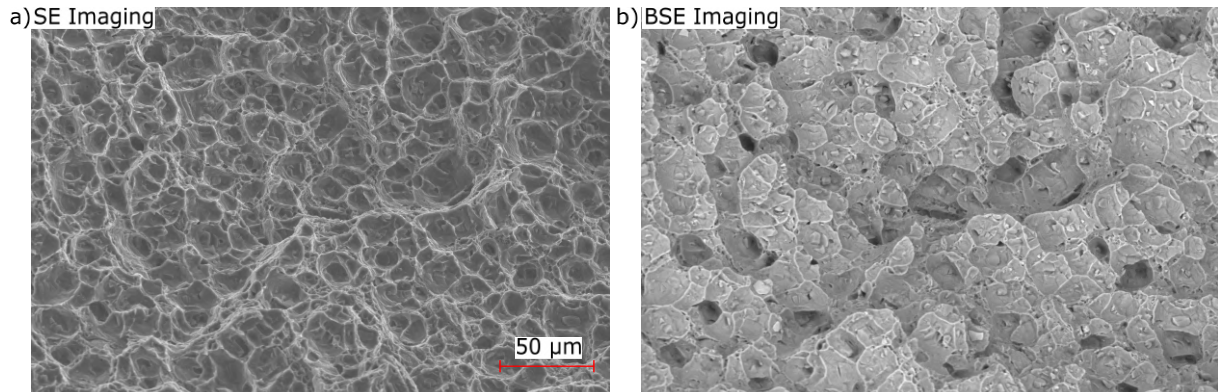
(a) SE and (b) BSE imaging of a ductile fracture surface. Dimples are visible and are typical of ductile fracture surfaces [76, 101, 106, 114, 176]. The BSE imaging suggest the presence of coarse inclusions in the dimples.
